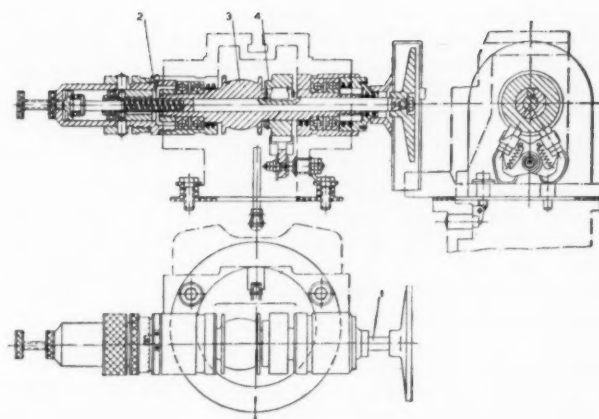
REDESIGNED MACHINE FOR ELECTROLYTIC GRINDING
